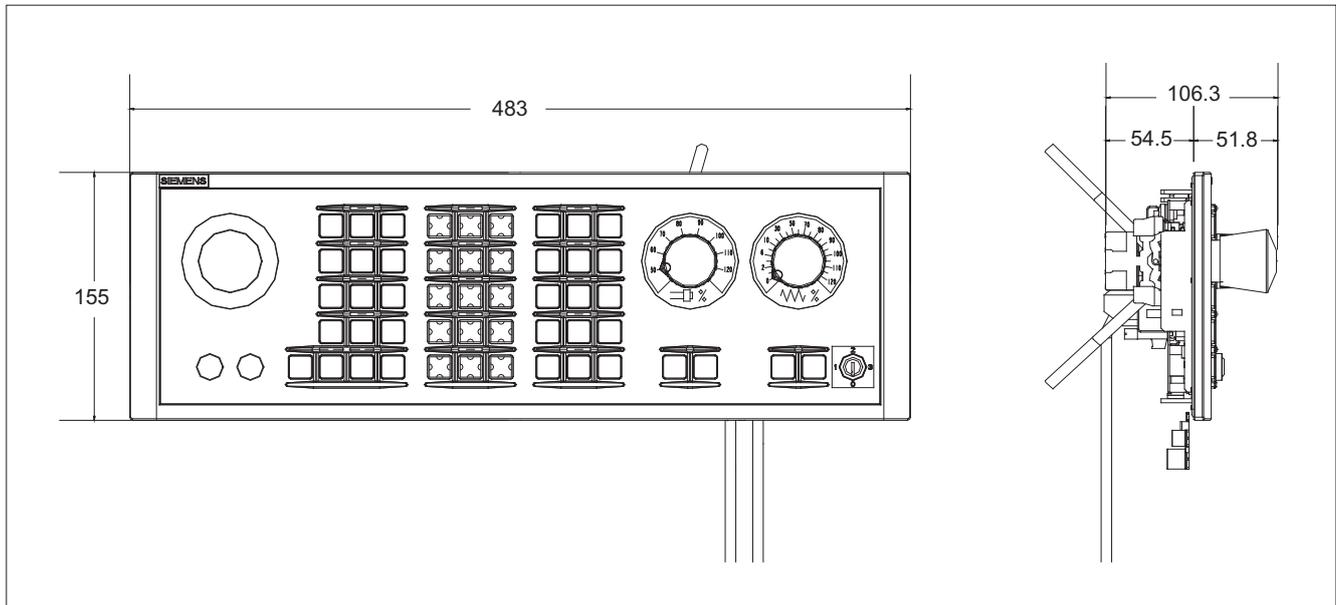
Front and side view of MCP 483C PN with connecting cable (handwheel and Ethernet)
